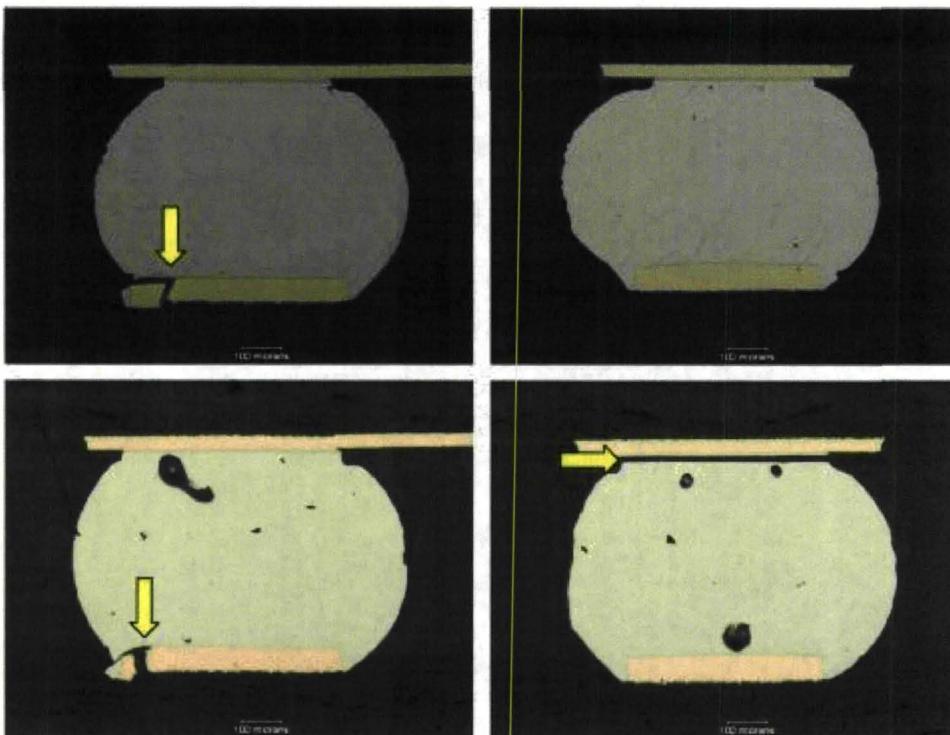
Test Vehicle 34 - Four Corner Balls of BGA U6 (SnPb Solder/SnPb Balls)
